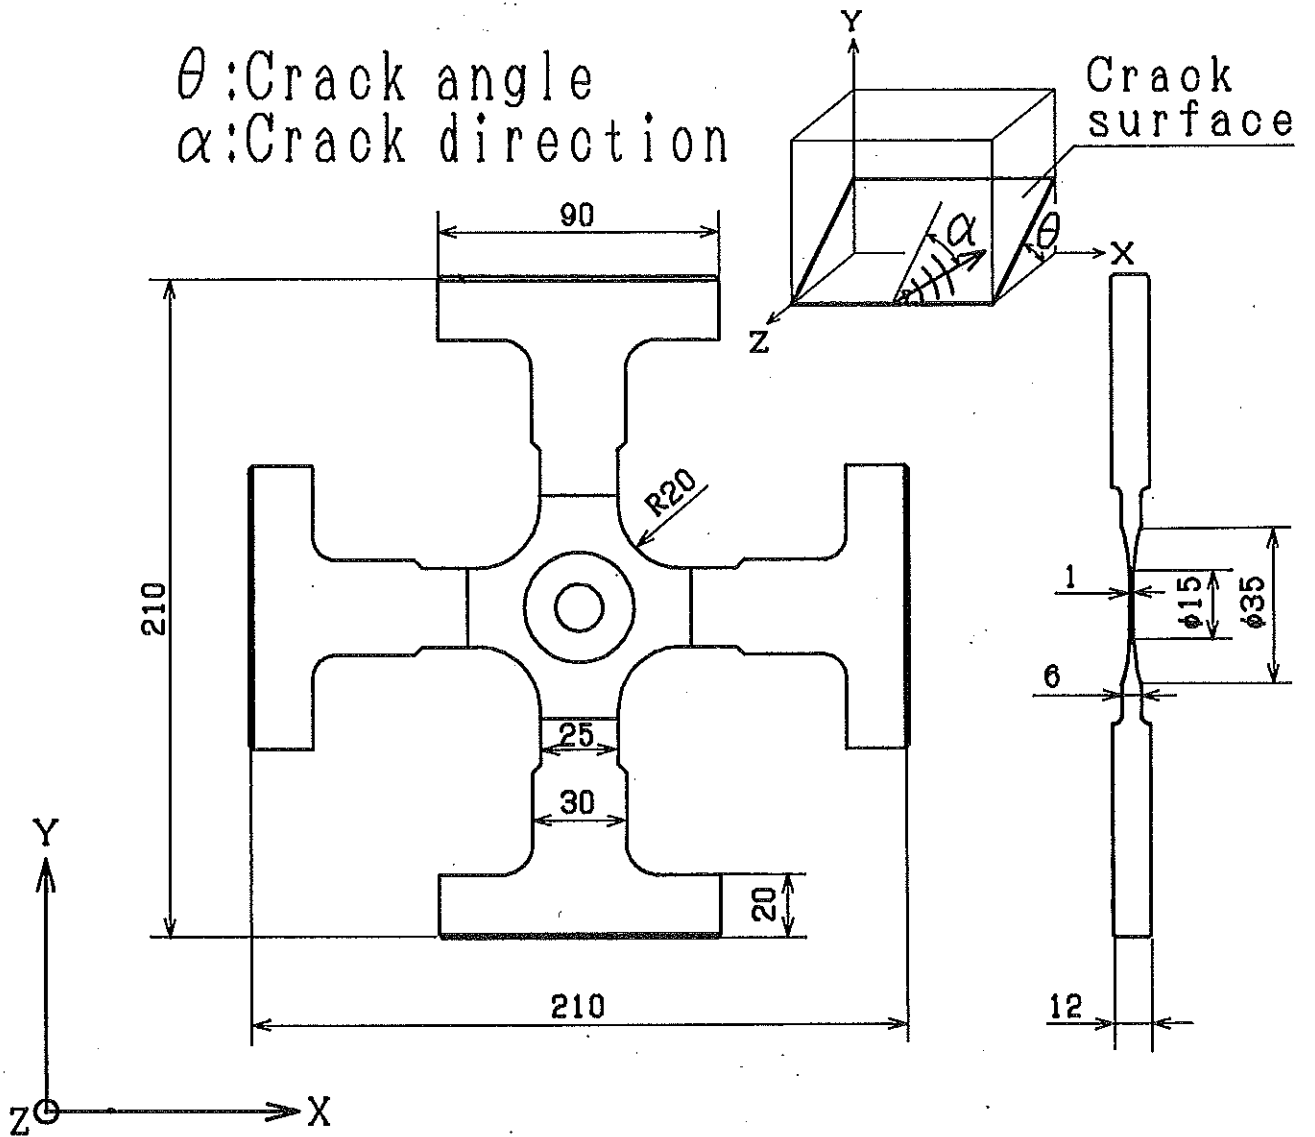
Shape and dimensions of the cruciform specimen together with the coordinate system.
